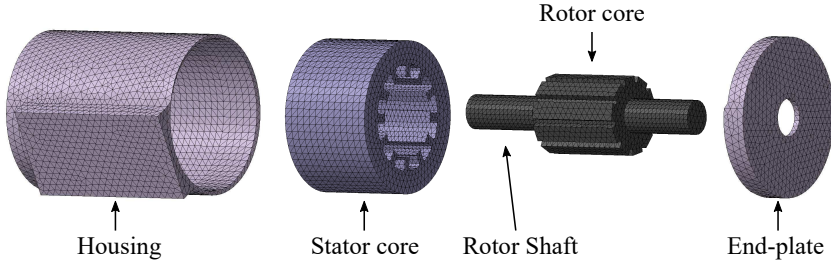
Exploded view of the PMSM meshes composing the assembly
